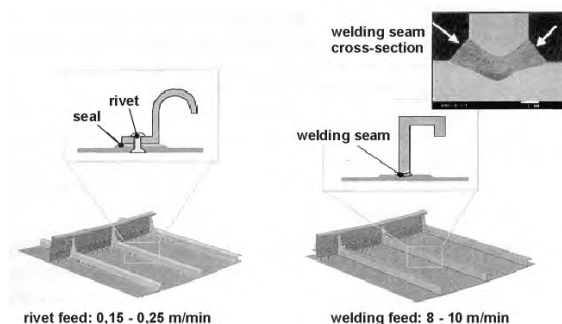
Comparison between rivet design and laser-beam welding of a skin-stringer joint [1]
